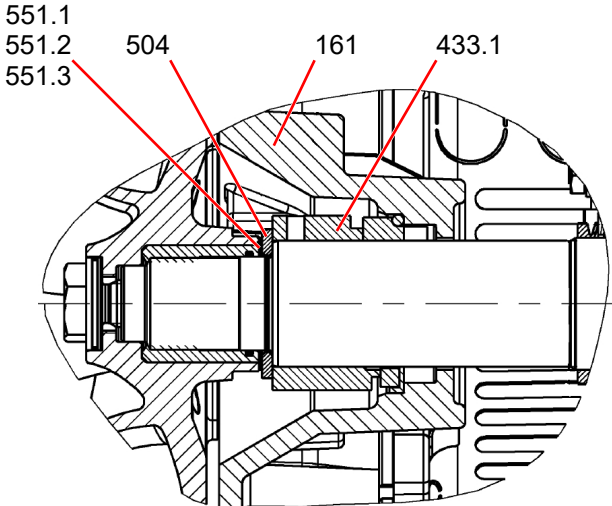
Mechanical seal – single-action (BS24 – BS32)
